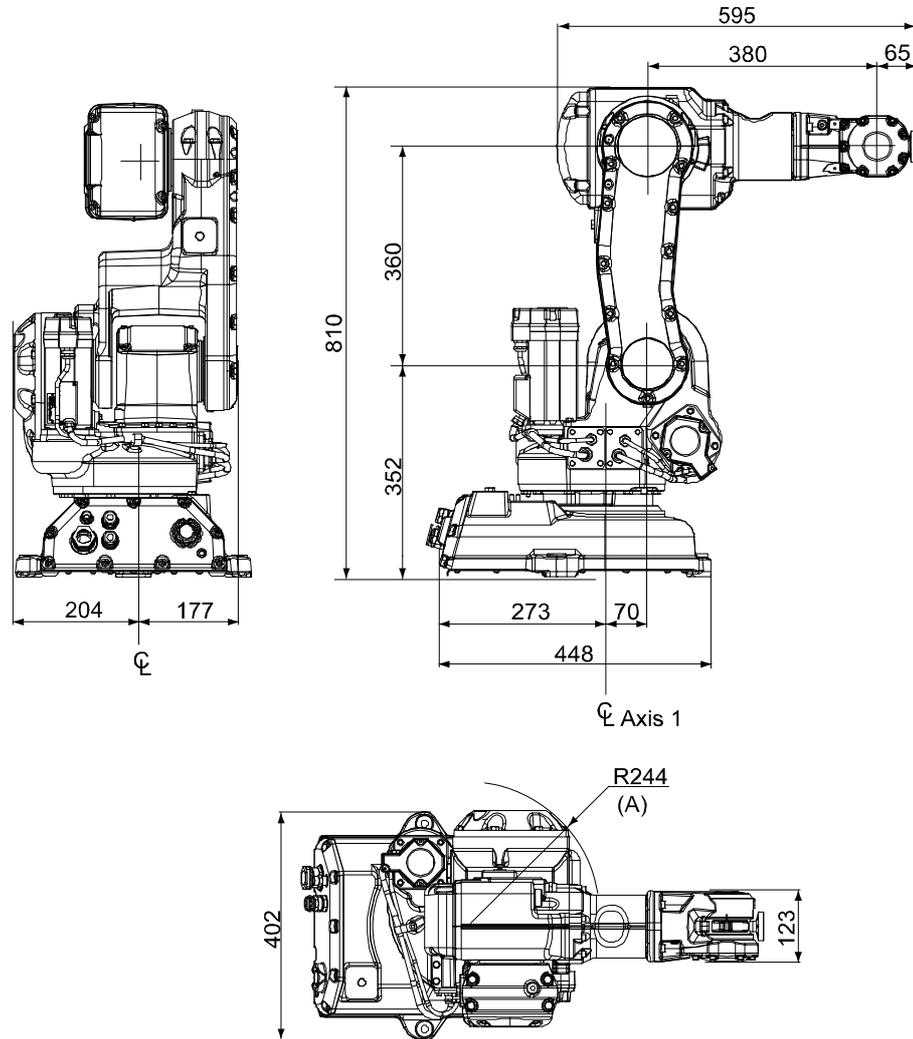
View of the manipulator from the back, side and above (dimensions in mm).
